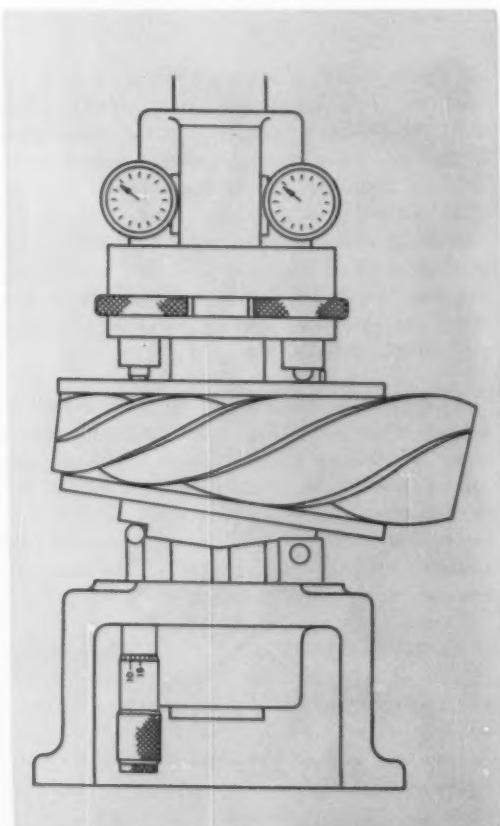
Bench model micrometer used for inspection of tapered spiral reamers.
